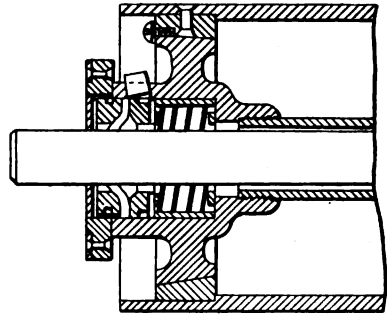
LATEST TYPE OF ROLLER SPECIALLY DESIGNED FOR USE WITH ROLLER BEARING
